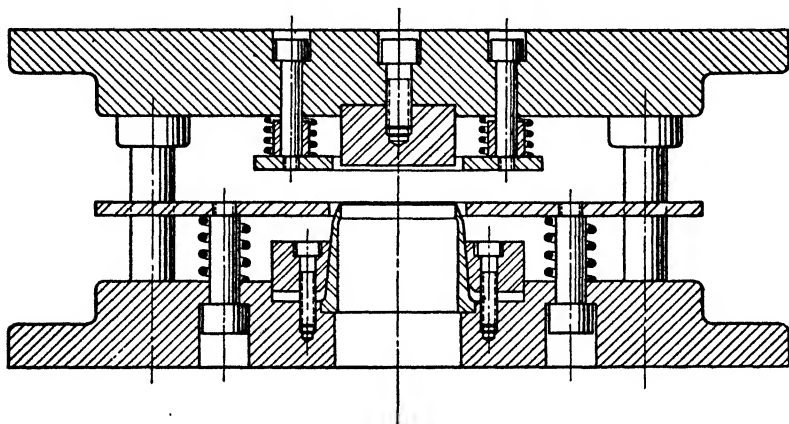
For smooth-edge production blanking of laminated materials, a hollow cutter is rigidly mounted in inverted position.
